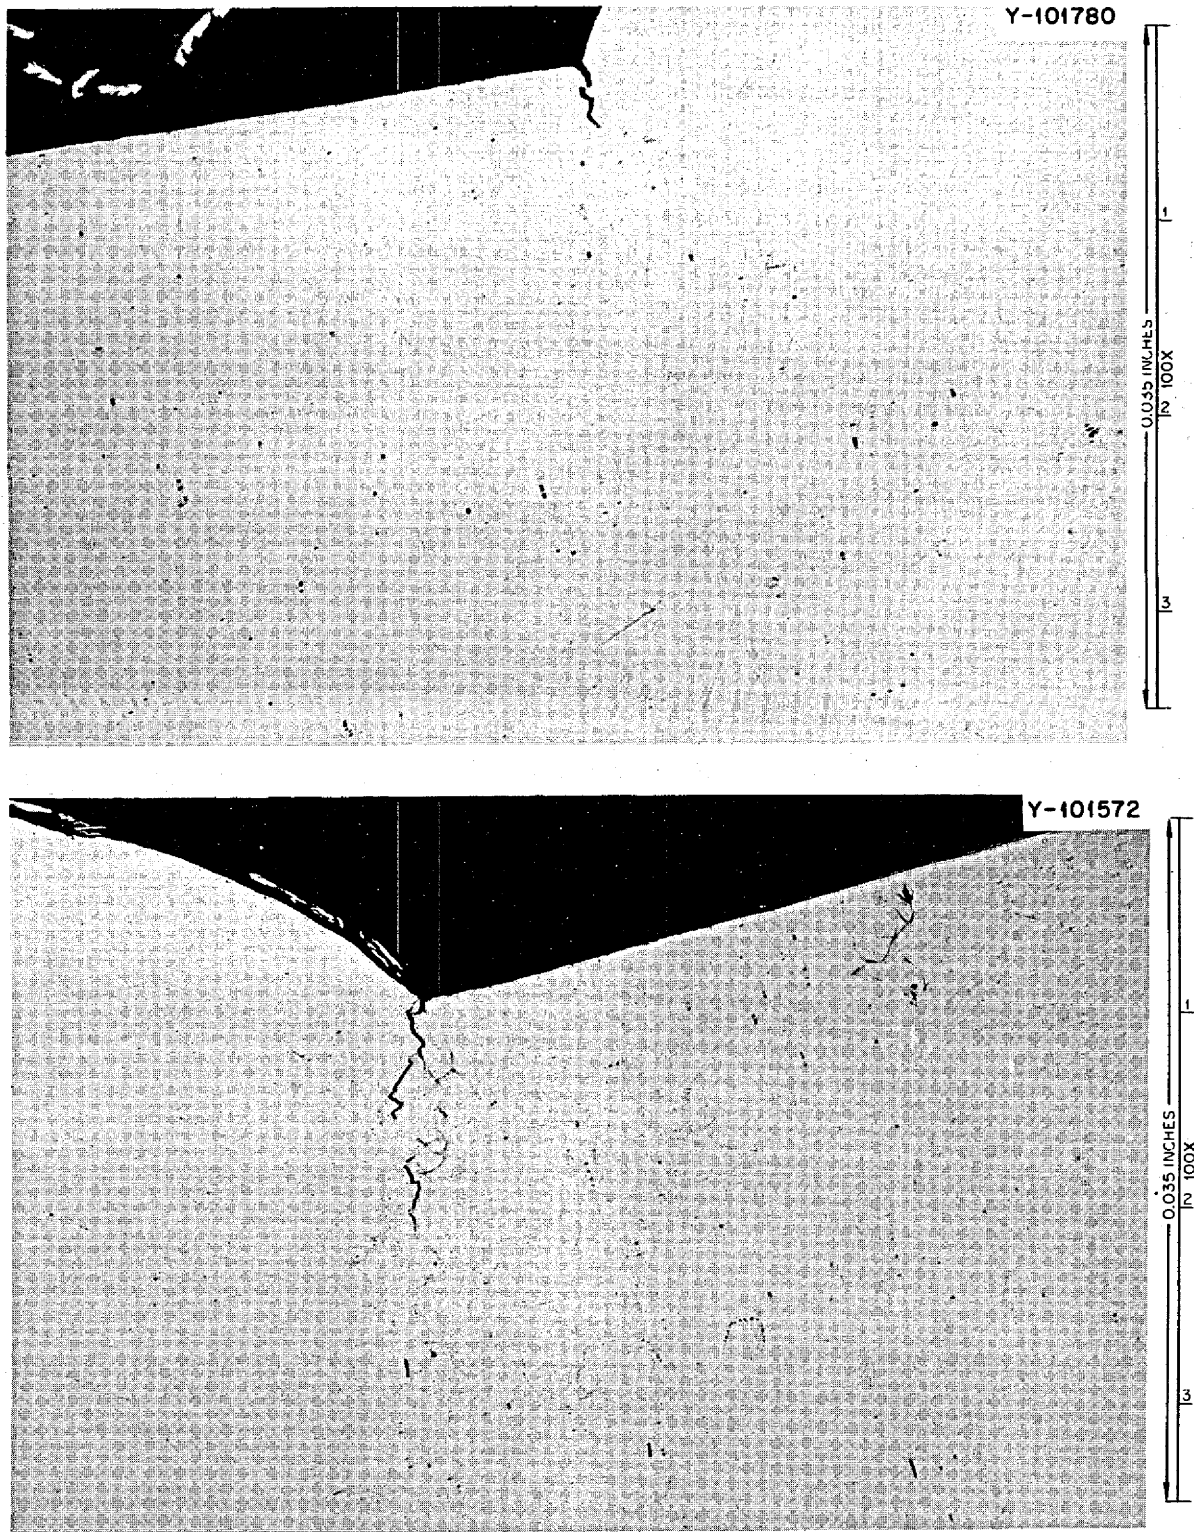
Photomicrographs of Cracks in the Root Pass of the Inlet Weld. The cracks occur at the fusion line and likely result from the poor fitup of the parts. As polished.
